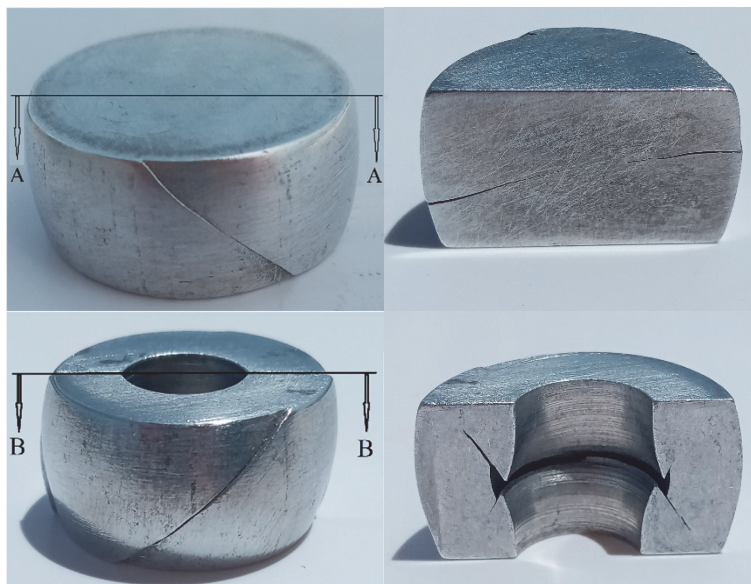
Cutaway views of upsetting specimens fractured show the direction and length of the crack.
